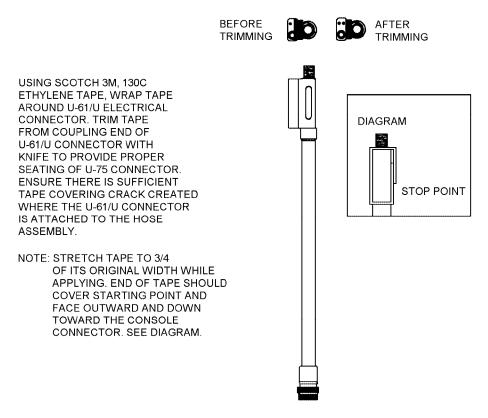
Modified Regulator to Seat Kit Hose Assembly Taping
